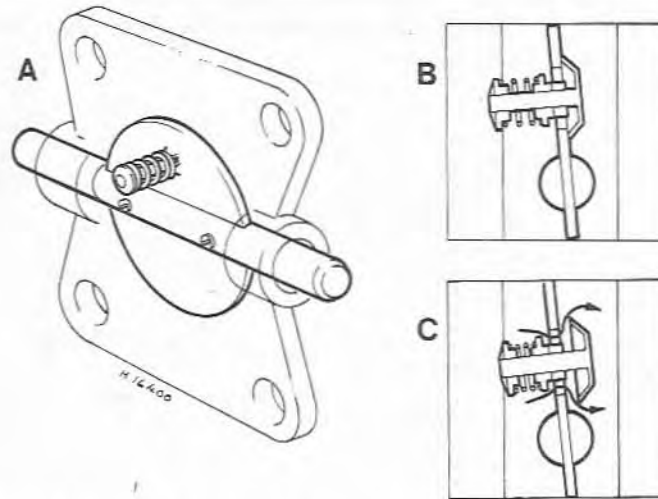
Diagram of overrun valve fitted to throttle valve (Sec 1)
